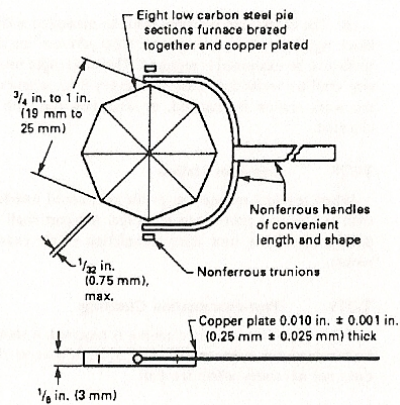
PIE-SHAPED MAGNETIC PARTICLE FIELD INDICATOR
